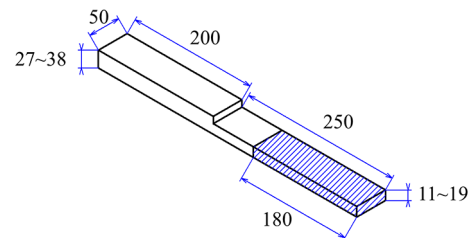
Shape of the steel coupon for tensile test for the connection (unit: mm)
